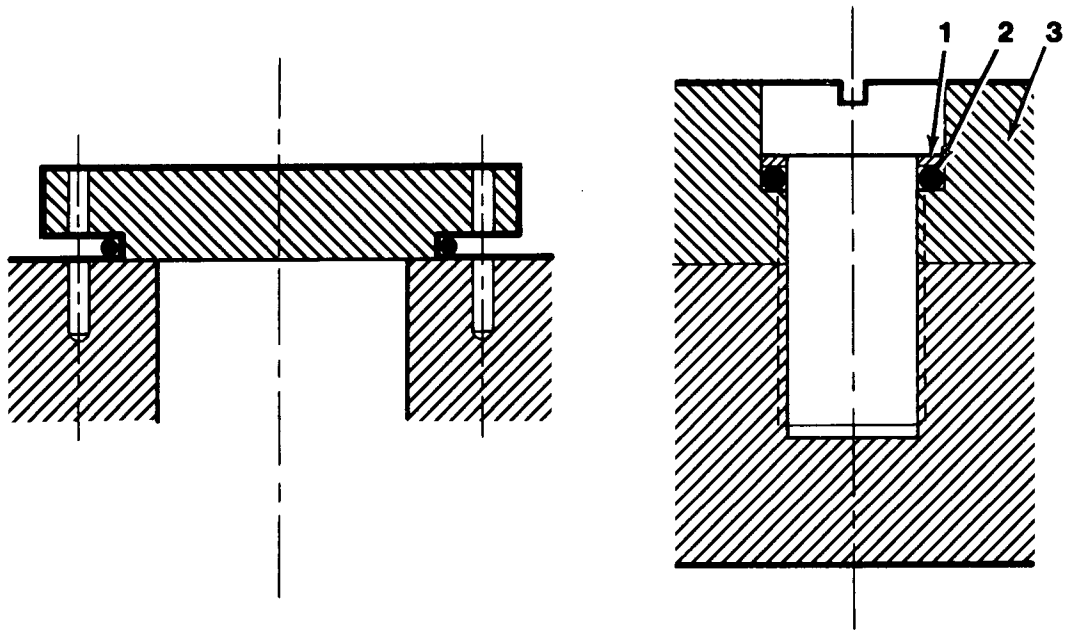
Step Seals With O-Rings (Ref. 3.4-2).
